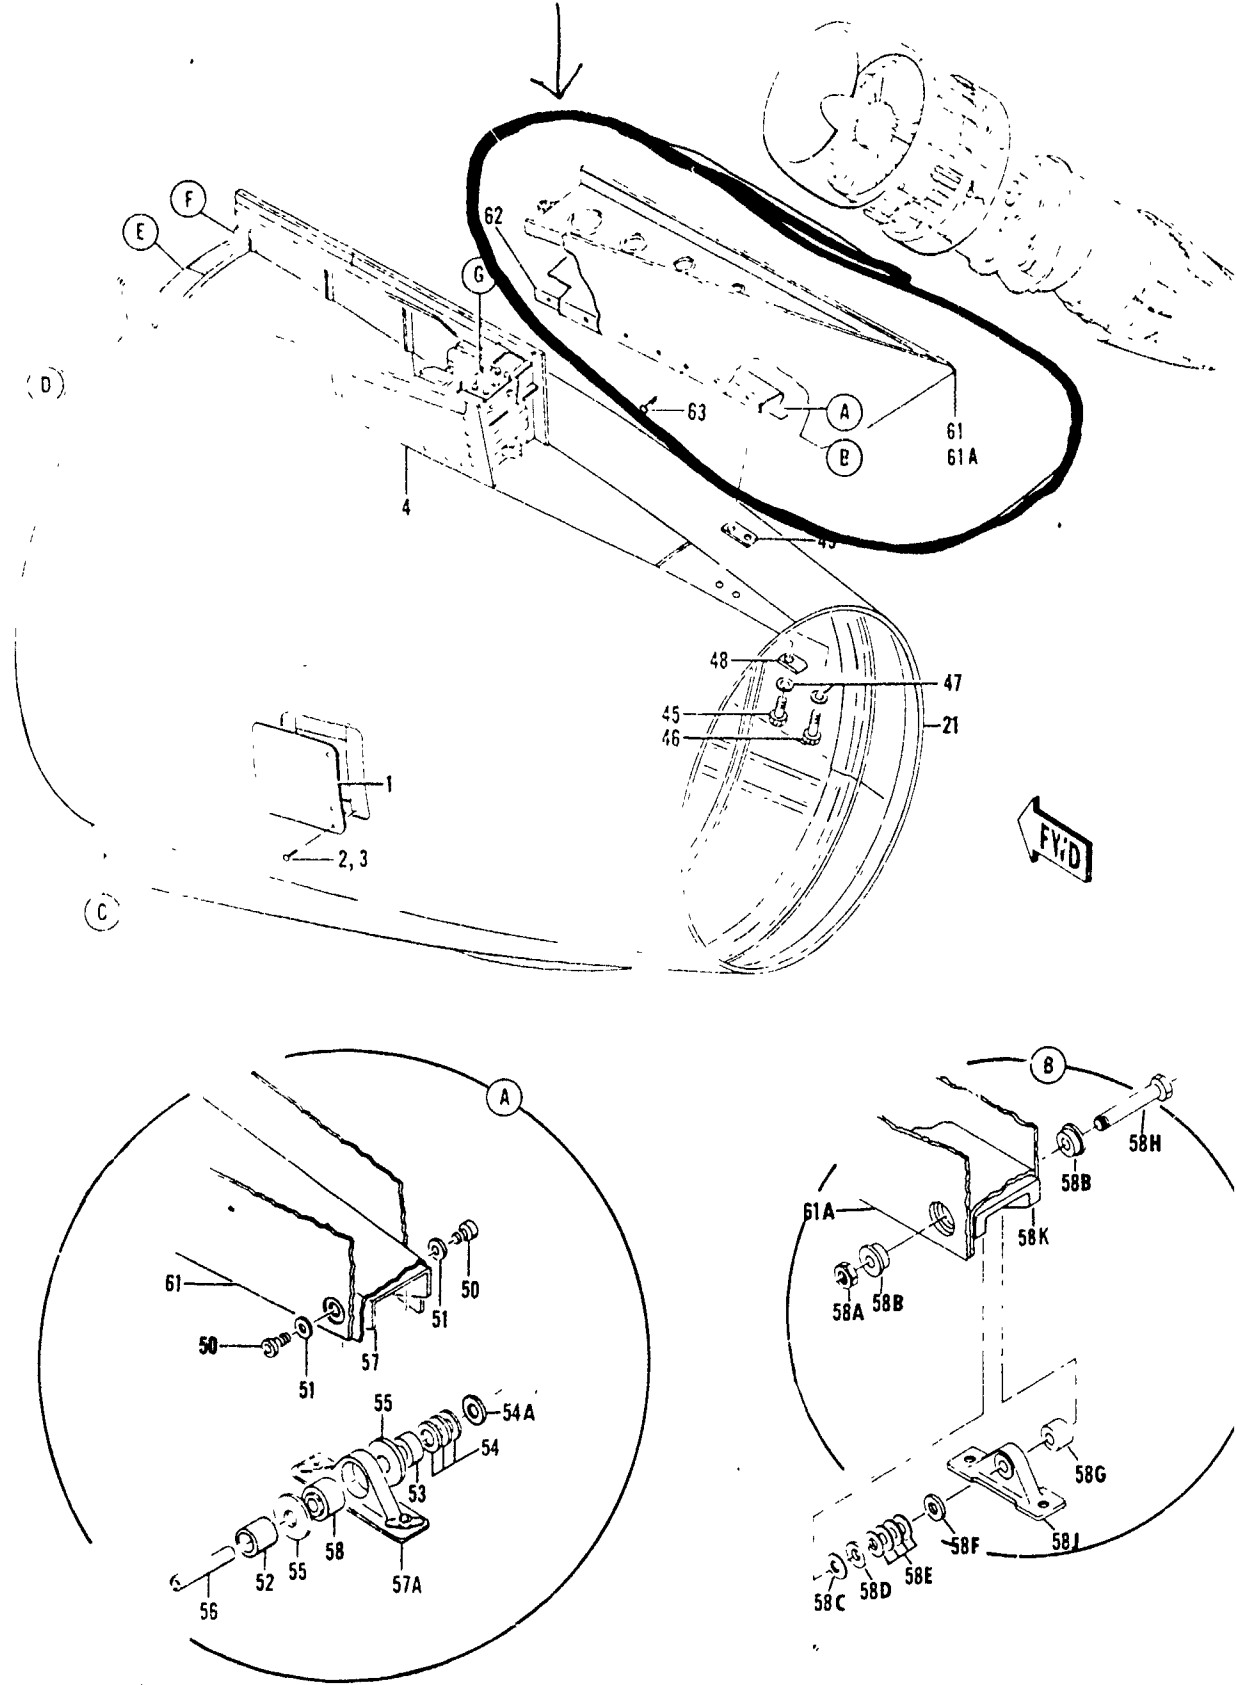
Aft Thrust Reverser and Sleeve Assembly (Sheet 1 of 3)
